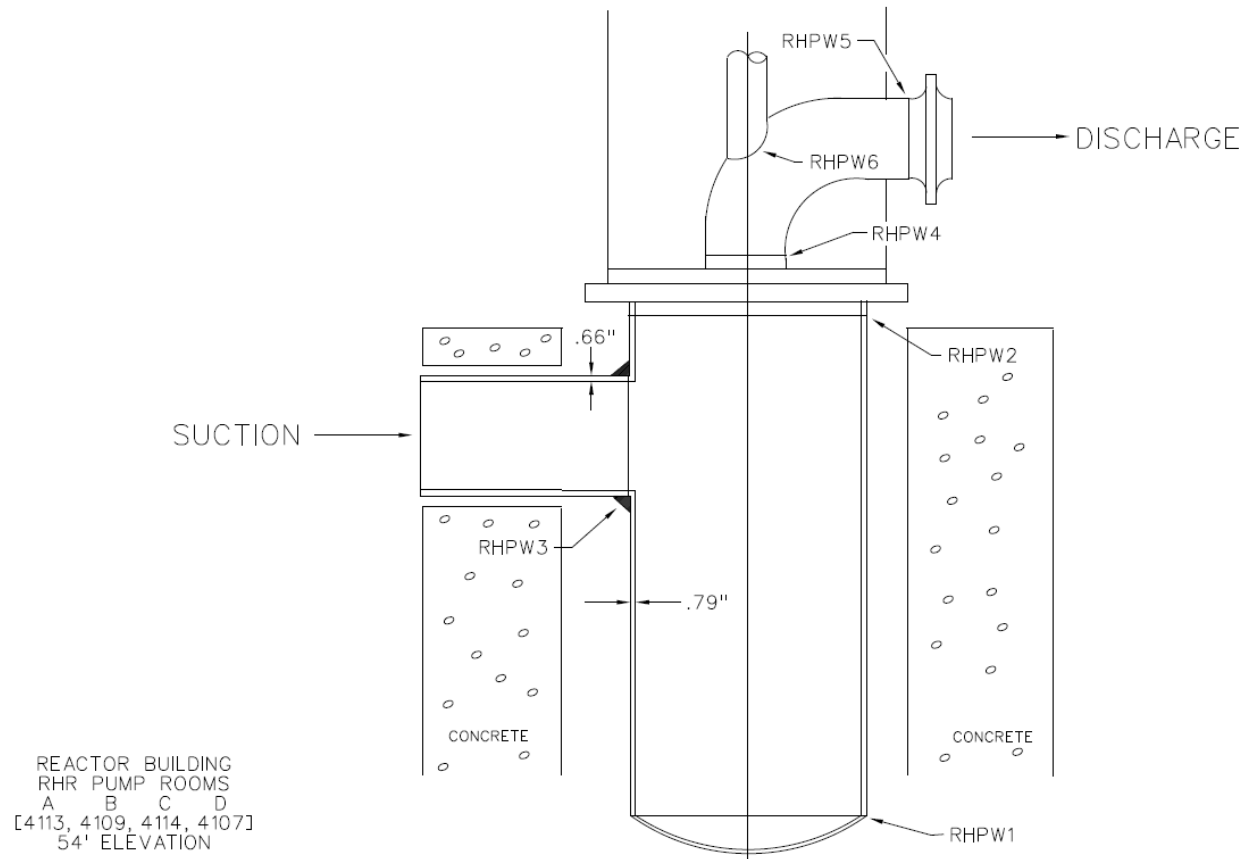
Weld 1-DP-202-RHP-W3 (Extracted from Reference DWG B-3)
